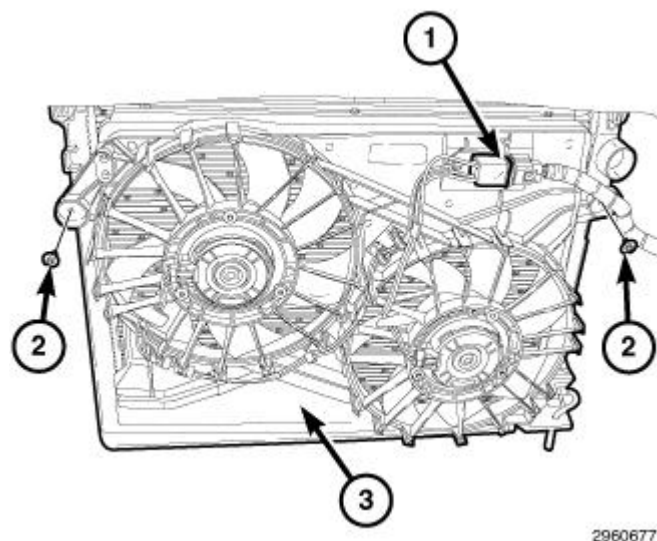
Cooling Fan Electrical Connector, Cooling Fan Mounting Bolts & Radiator Cooling Fan Assembly
